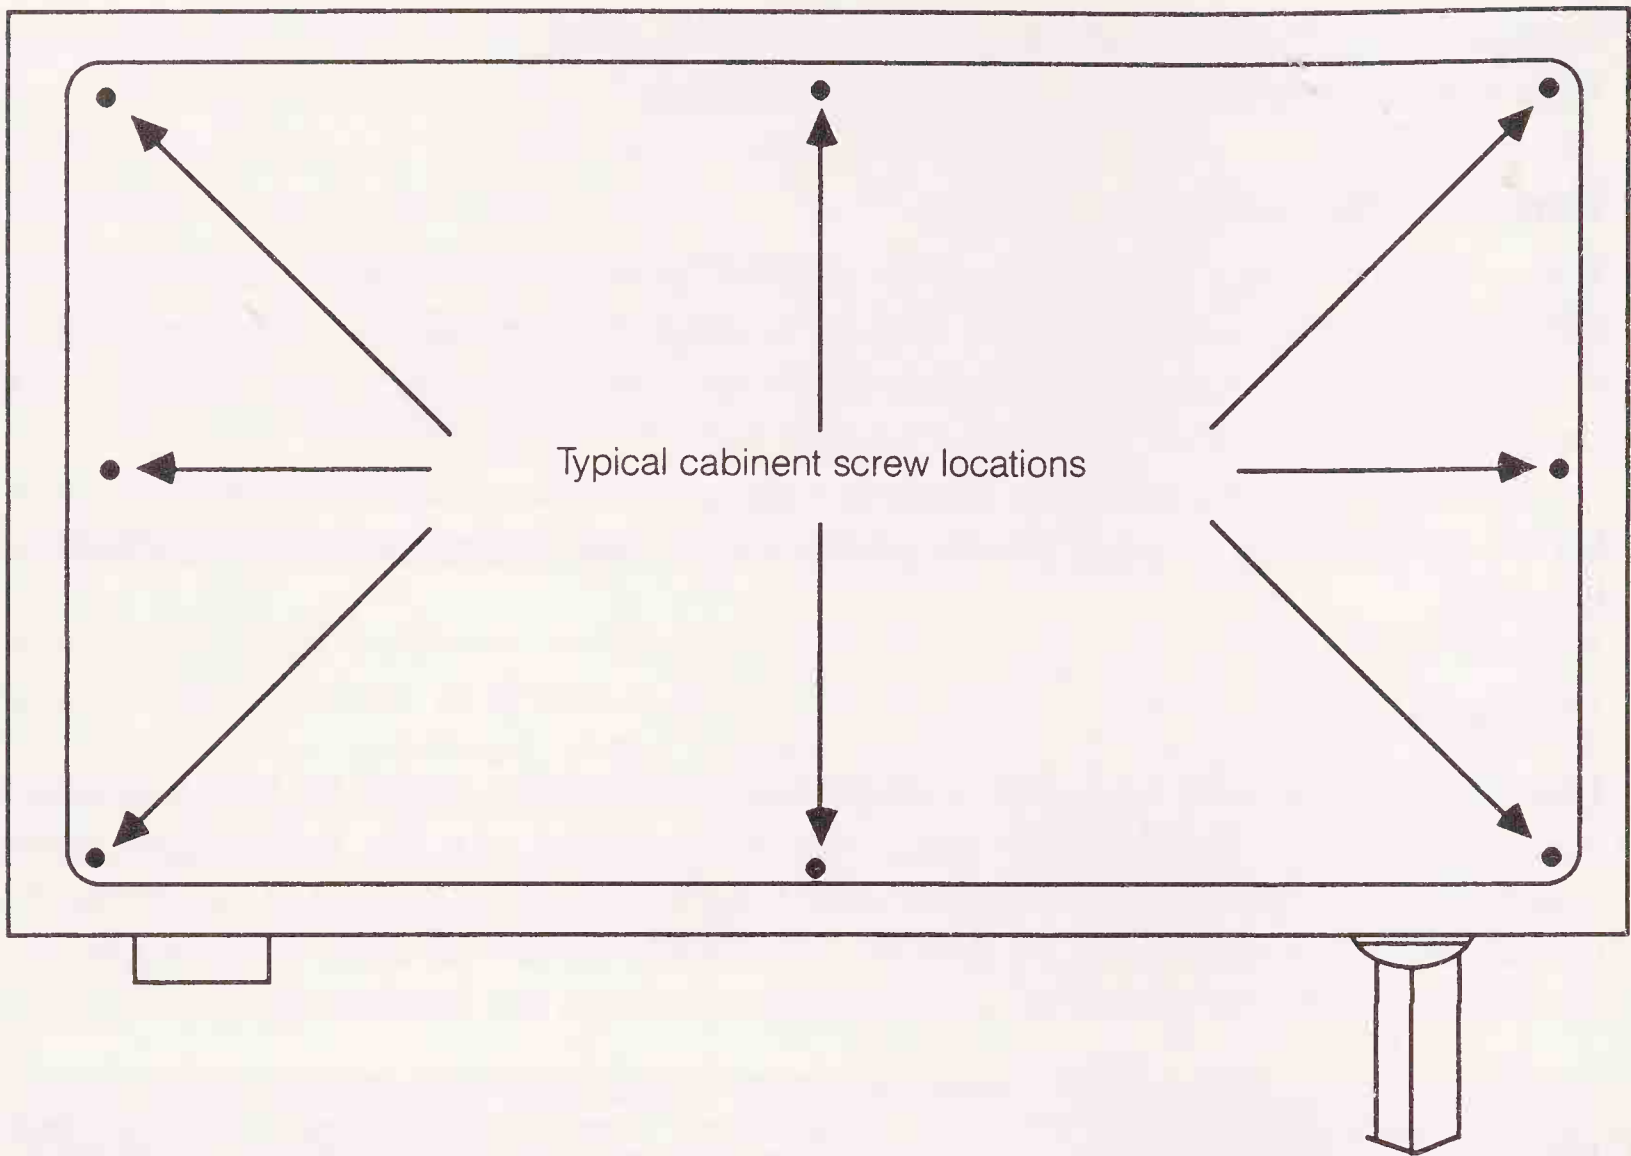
Typical screw locations for the bottom cover of the fax machine (your machine might differ).
